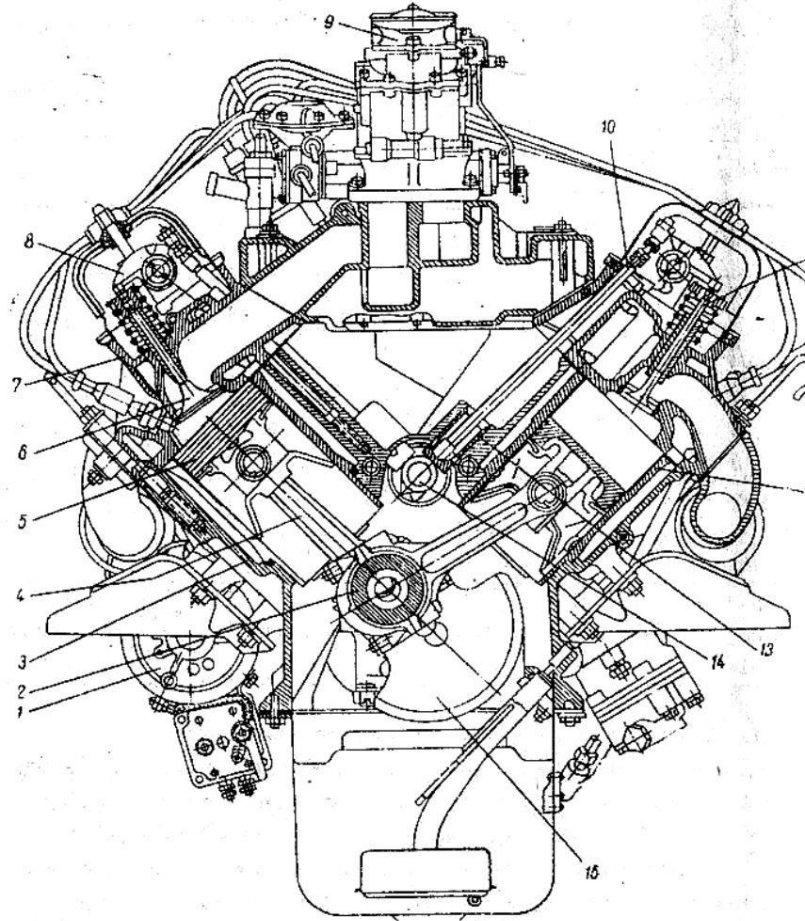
Cross-section of a carburetor engine with V-shaped cylinders. 1-starter; 2-crankshaft; 3-cylinder block; 4-connecting rod; 5-piston; 6-intake valve; 7-cylinder head; 8-rocker; 9-carburetor; 10-rod; 11-exhaust valve; 12-cylinder liner; 13-tappet; 14-distributor shaft; 15-crankshaft and camshaft.
